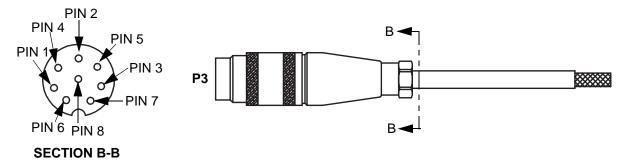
External Expanded Opto I/O Cable 378804 Wiring Diagram
